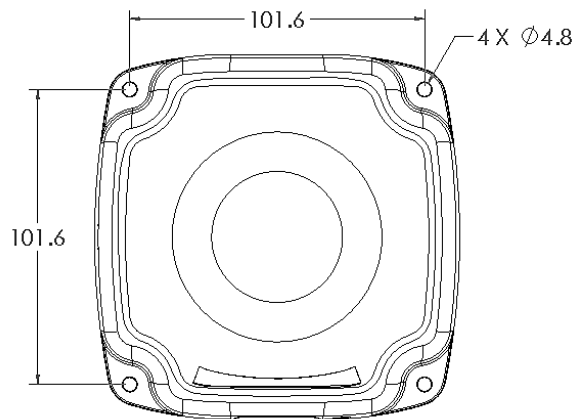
IDP-680 Top View Enclosure Dimensions (mm)
